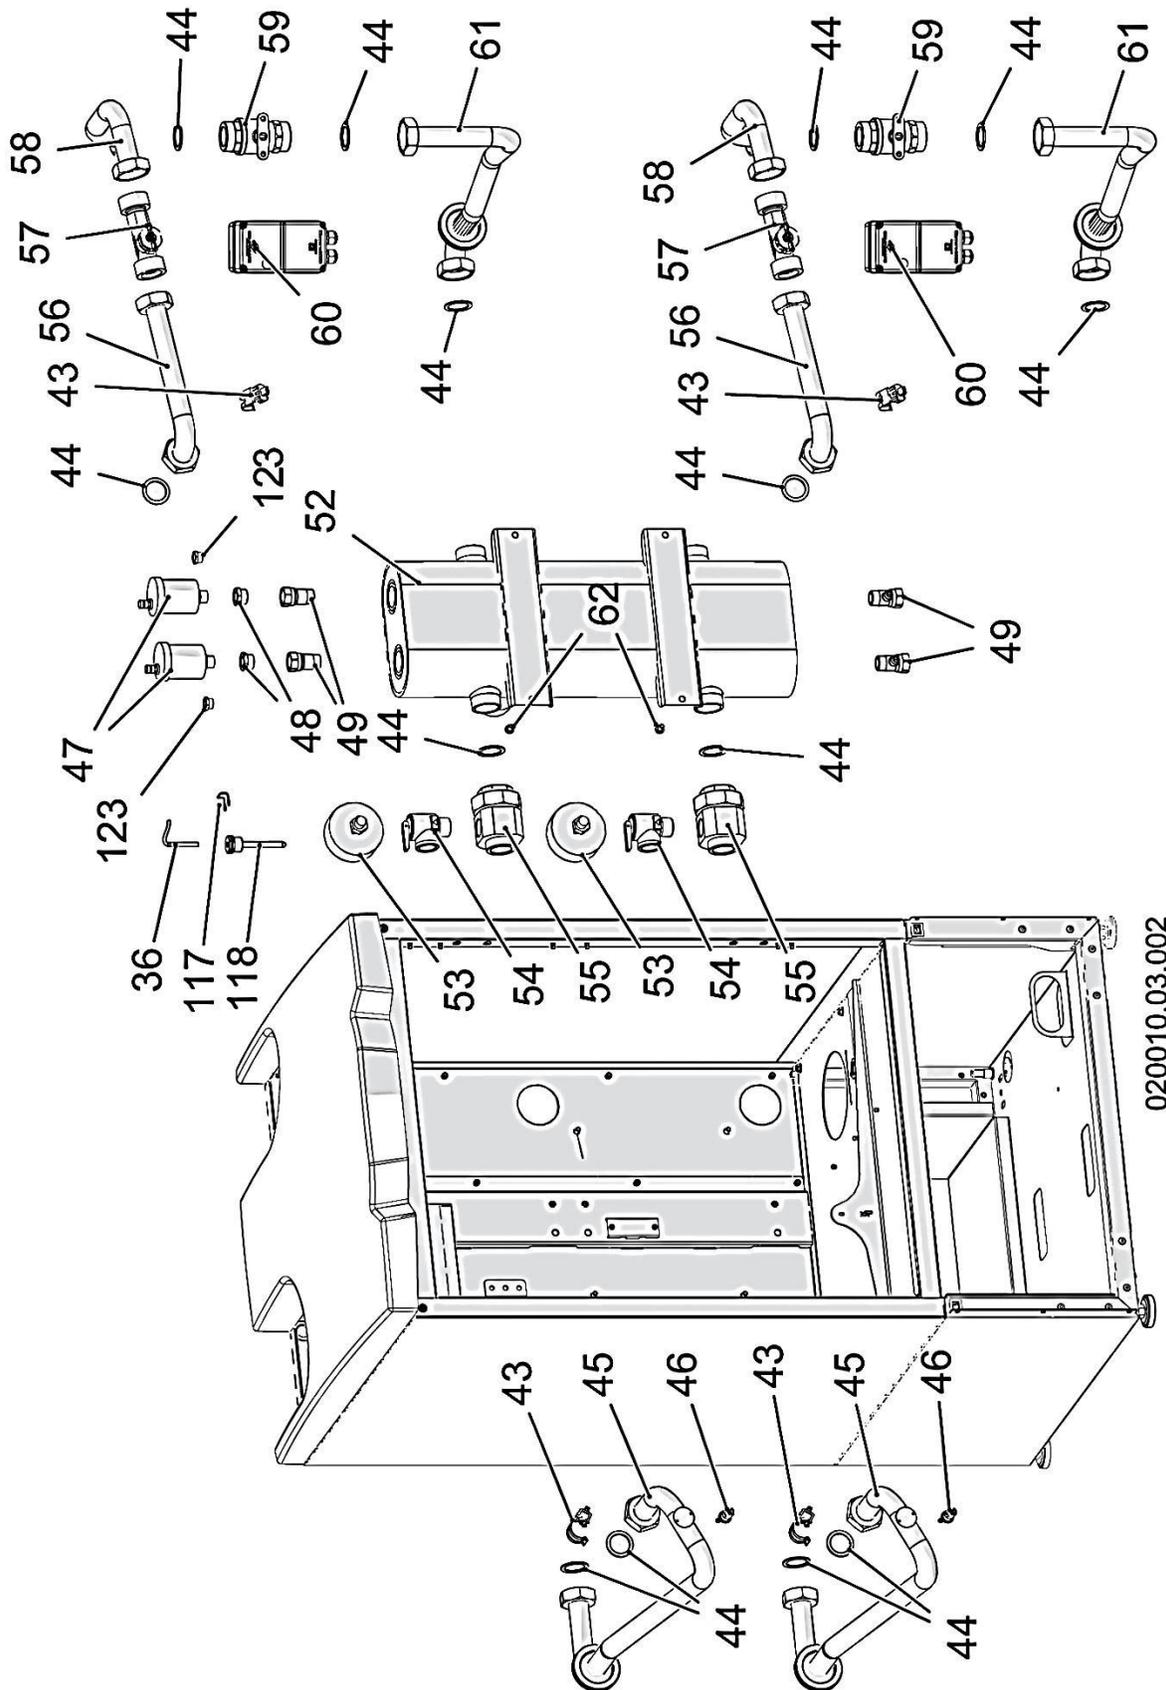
AM 399/500 General Assembly Parts drawing (2 of 2)
